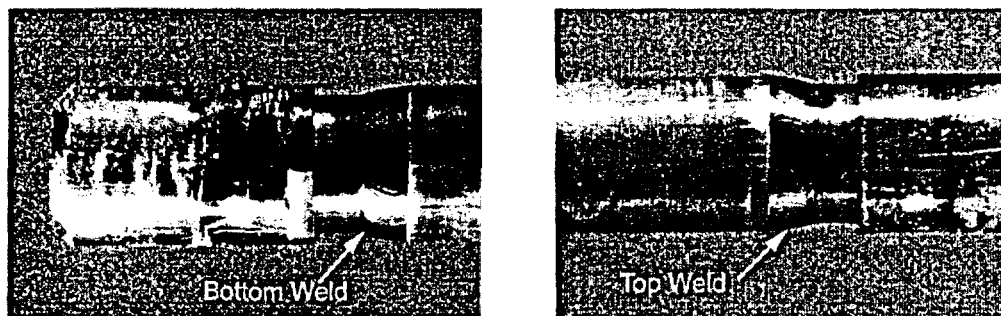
Actual End-Fitting Closure Welds.
